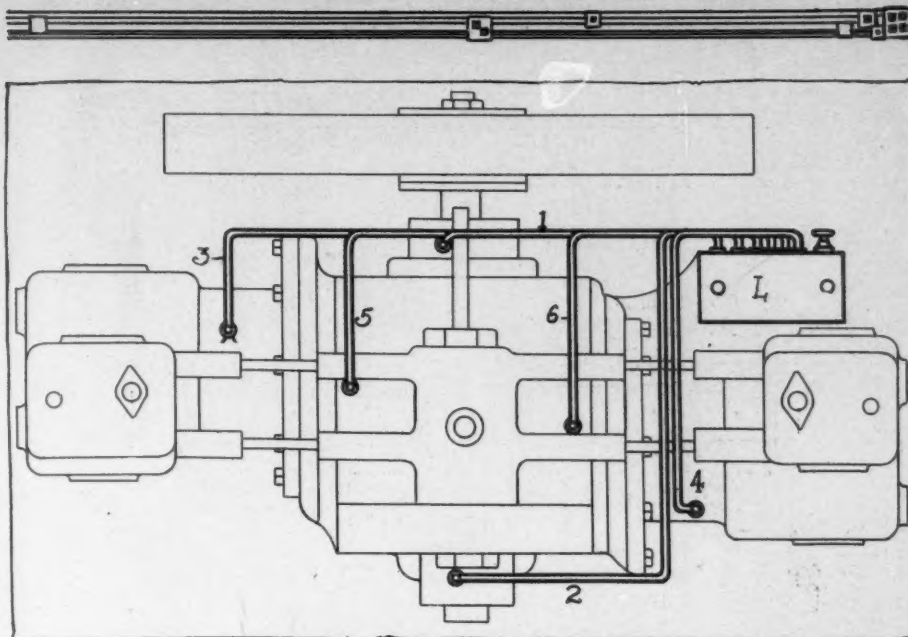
MECHANICAL OILING SCHEME ON SCHACHT MOTOR
